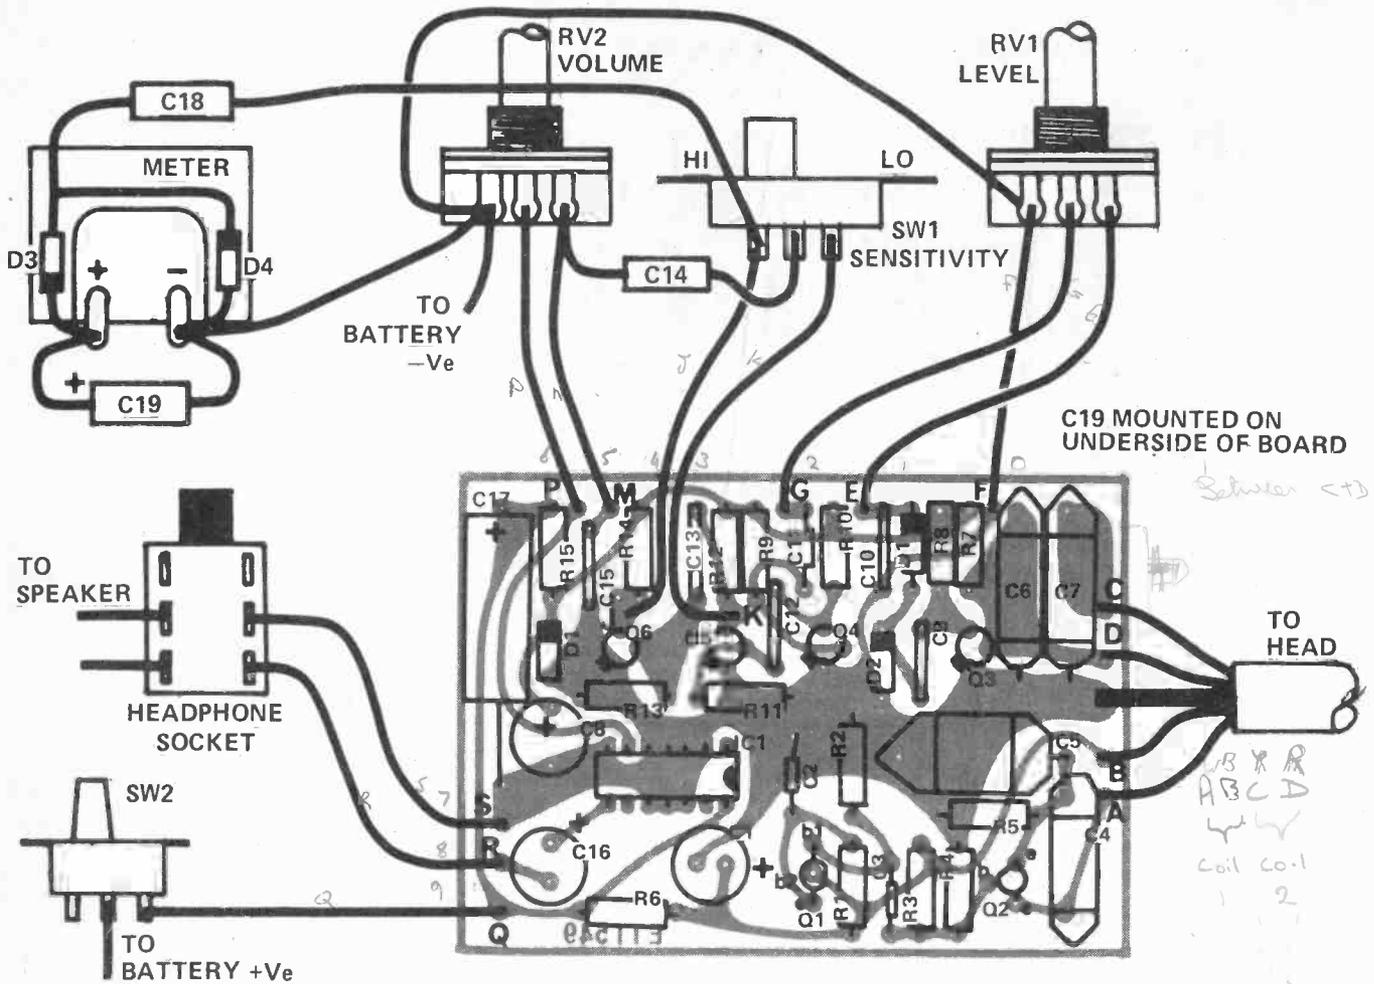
The component overlay and wiring diagram to other parts of the circuit not on the PCB.
